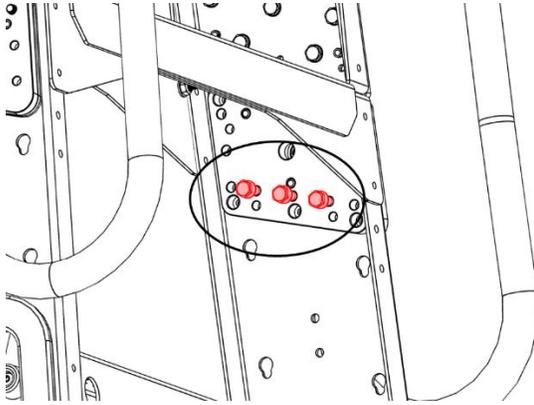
Install Handwheels through Extension tangs and into MX5+ receiver plates.
